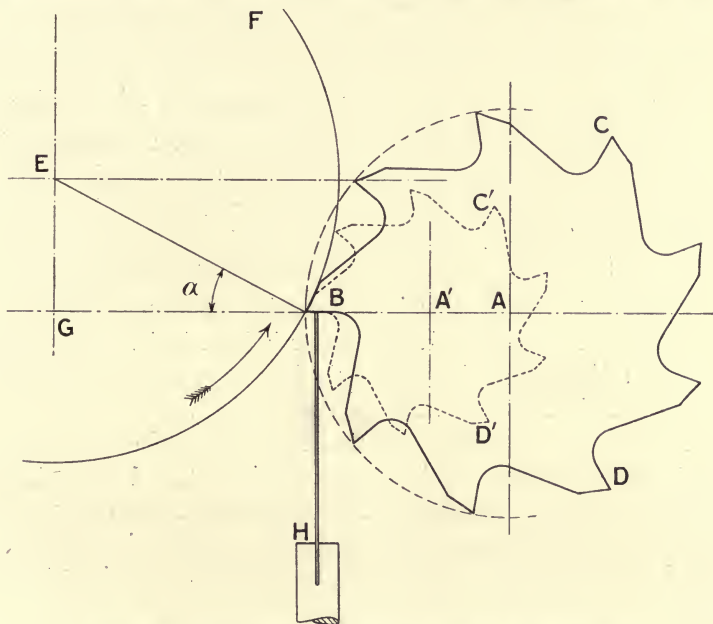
SETTING FOR CLEARANCE WITH DISC WHEEL
